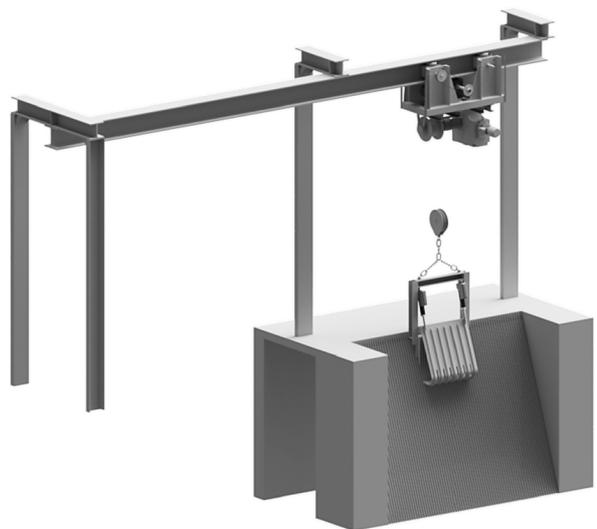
Configured Trash Rack Cleaning System (Illustration without Cables, Casing, Foundations, Top Plates and Screw Connections)
